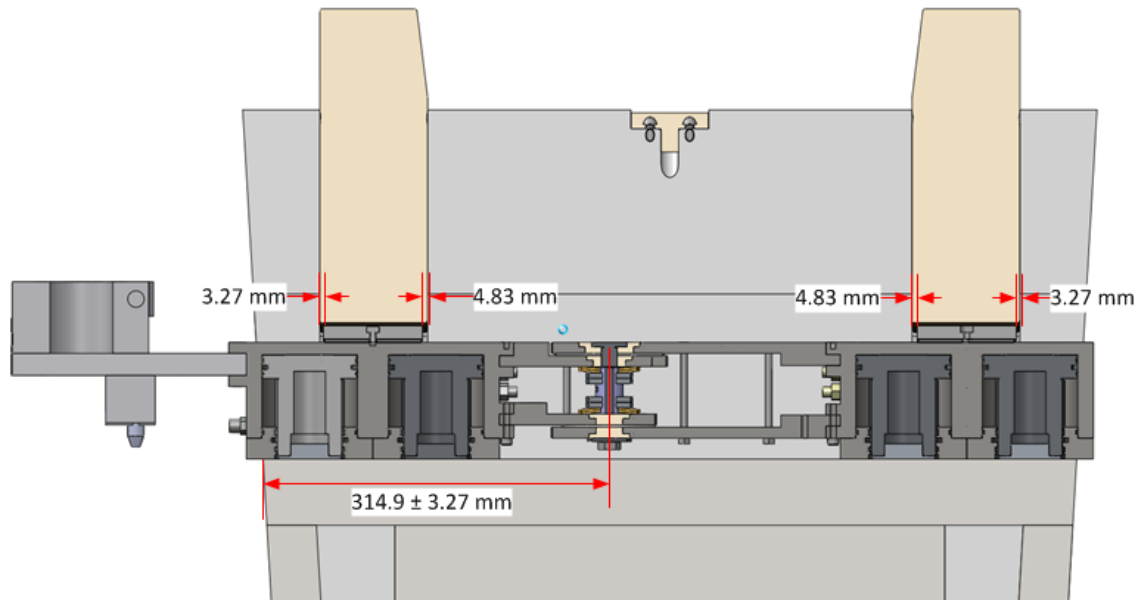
Optimal mounting depth and required mounting tolerance for RH WHJ [18]
